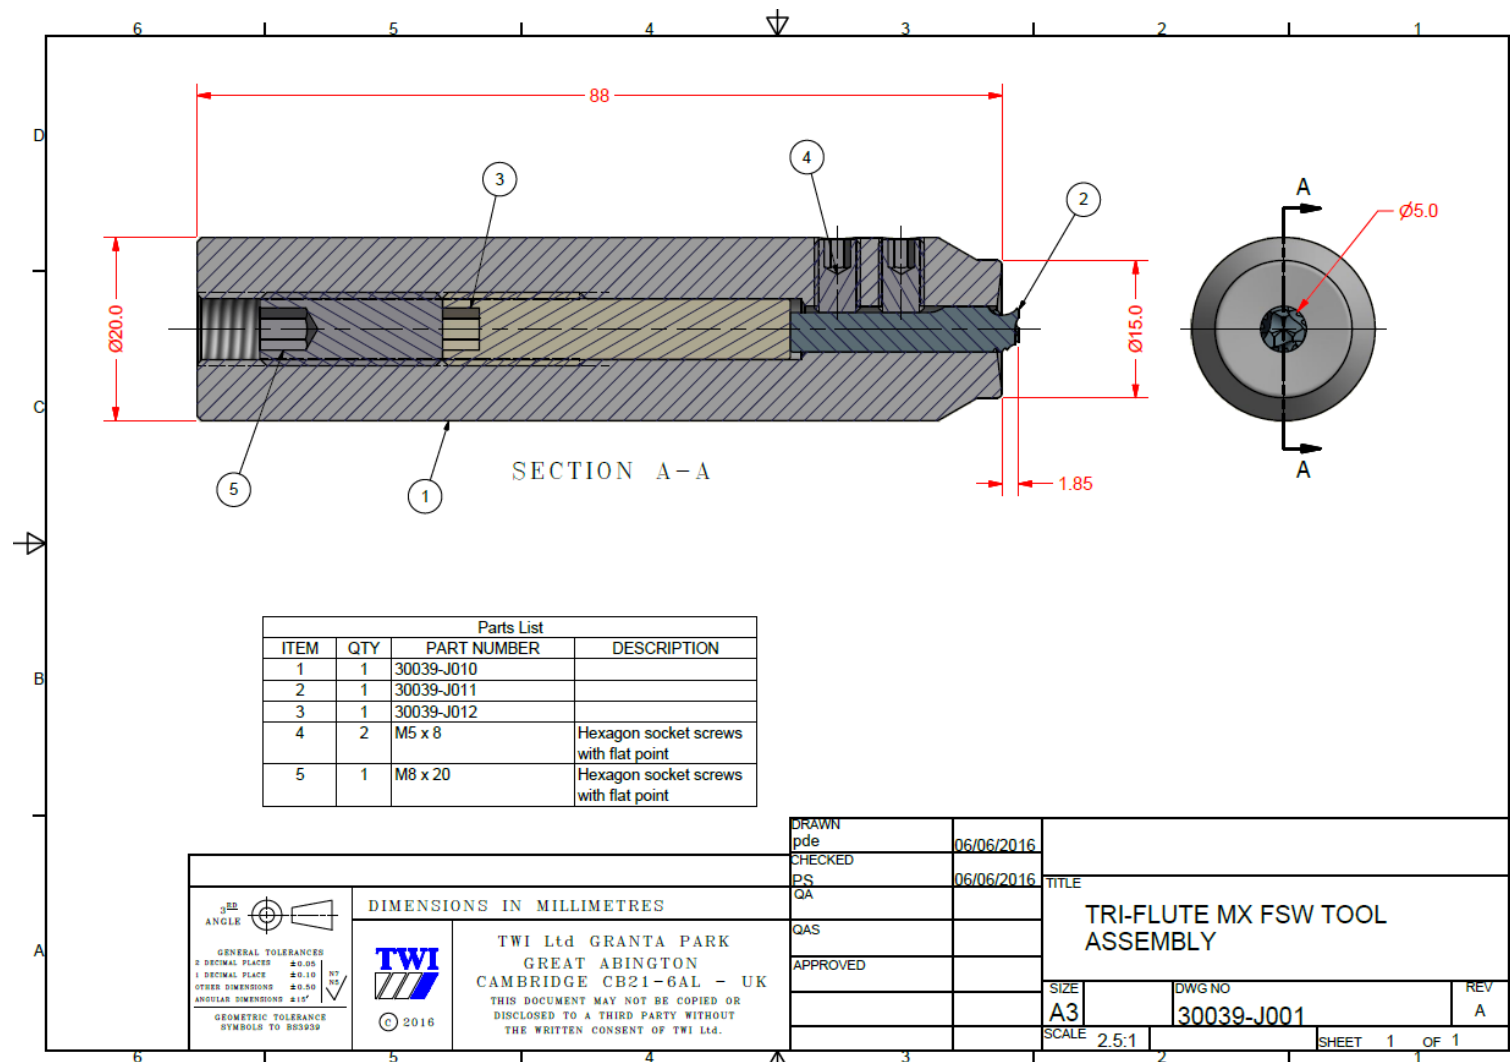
Assembled FSW tool for the 2 to 2.5 mm thickness combination
